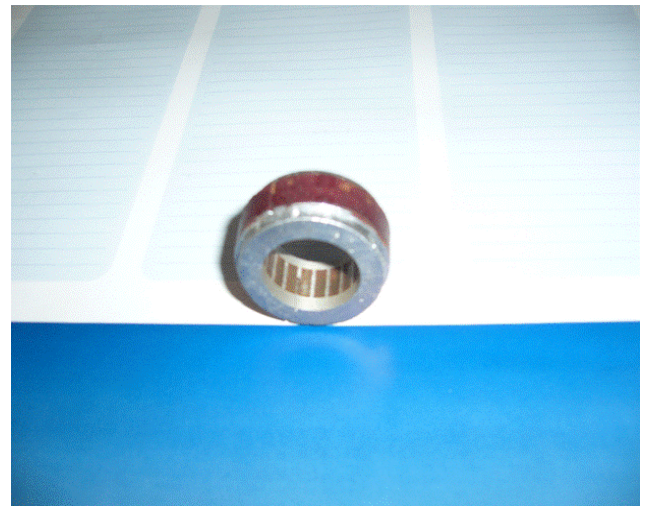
SMPs nano-strip multilayer's covering O-Ring used in the bearing turbocharger after one full test
